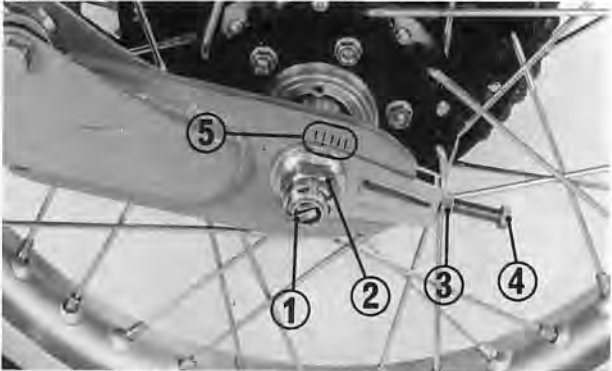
(1) Cotter pin (2) Rear axle nut (3) Lock nut
